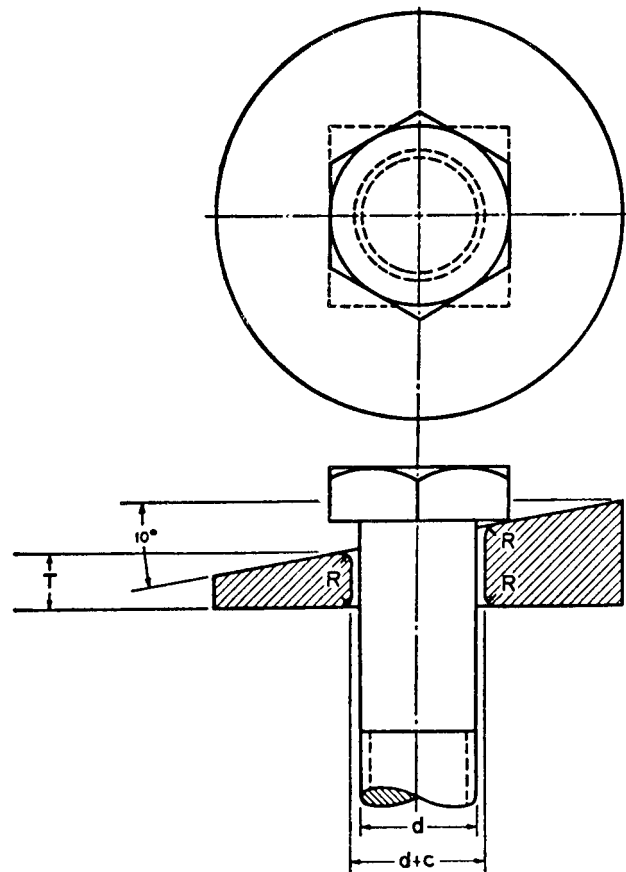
TENSION TESTING FULL-SIZE BOLT
